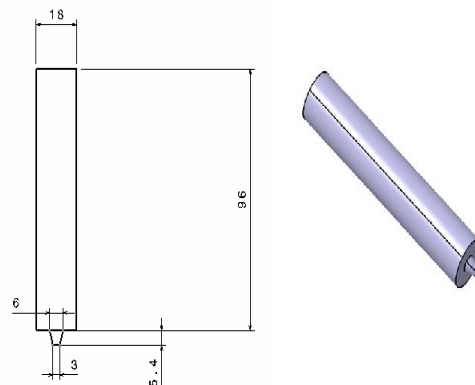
2D & 3D models of FSW tool with Conical Pin
